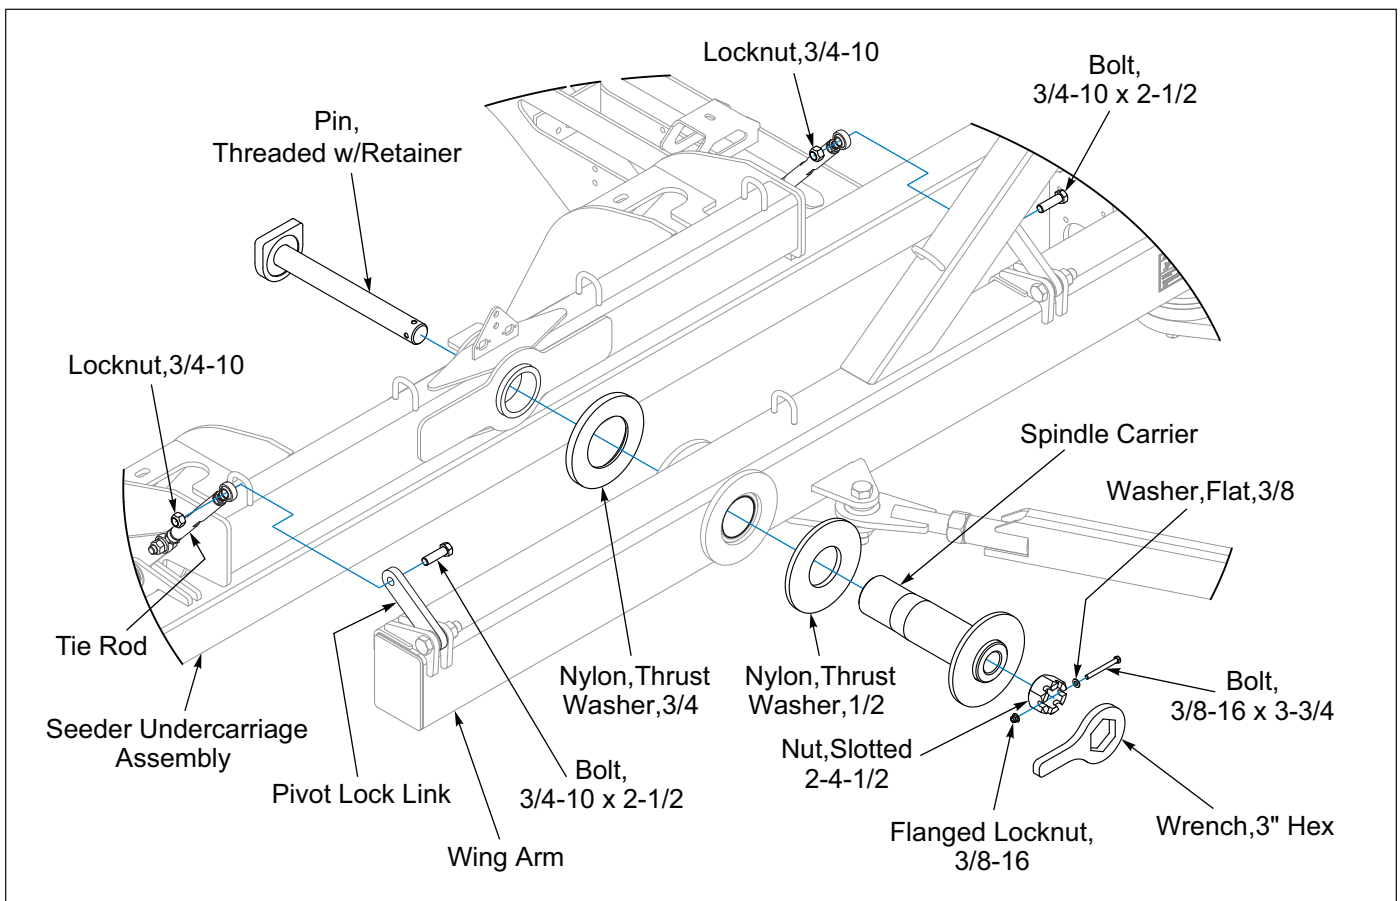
Seeder Undercarriage Assembly to Wing Arms
